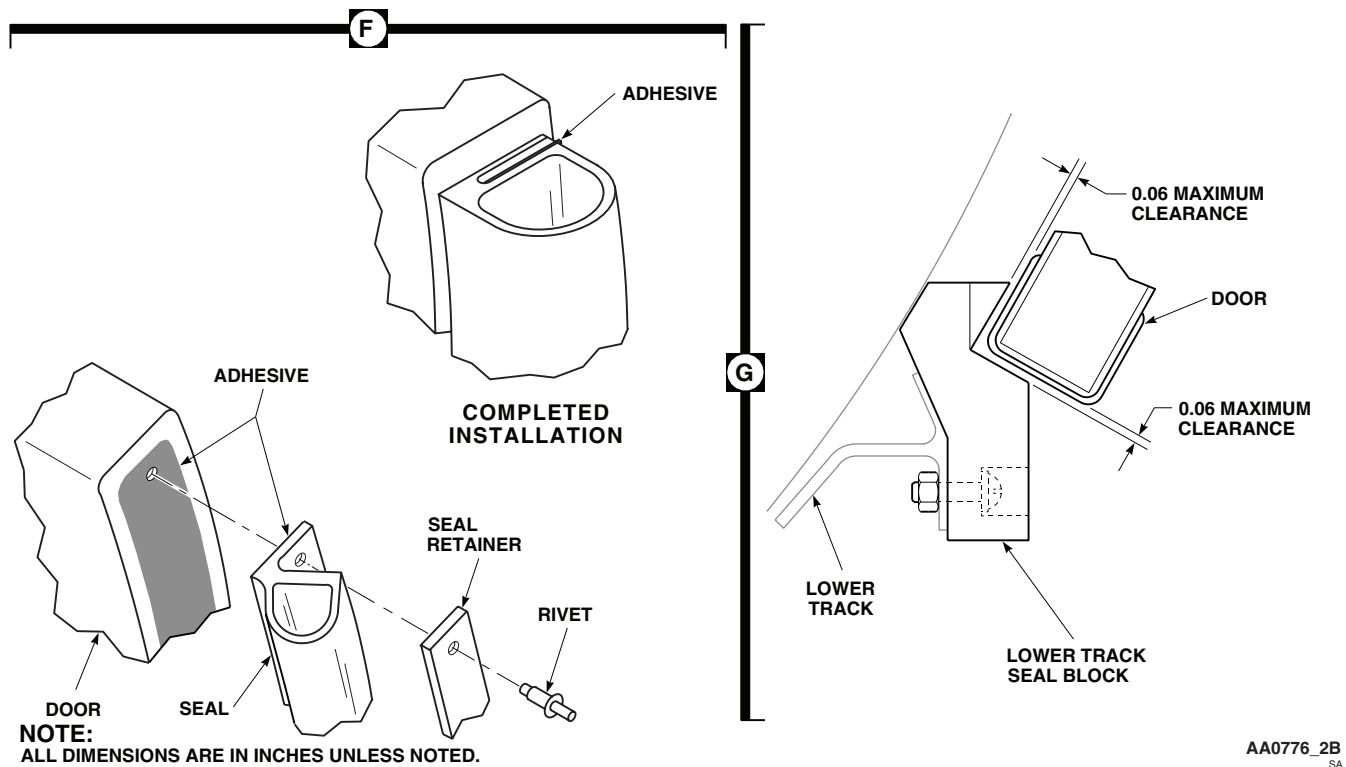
Replace Front and Lower Seals. (Sheet 2 of 2)
